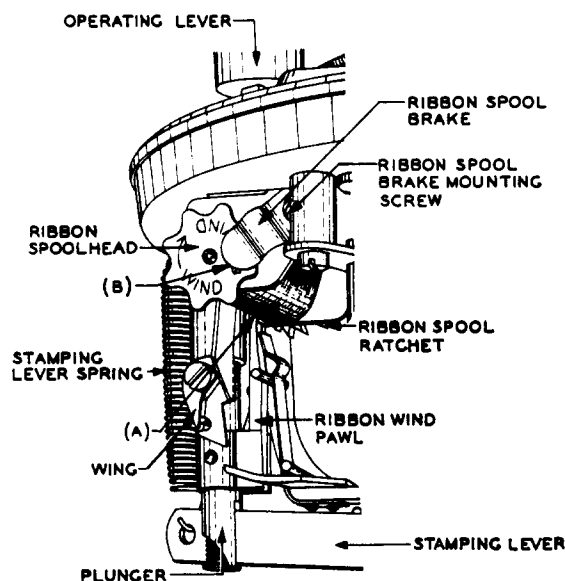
Full Spool Ribbon — Reverse Mechanism
